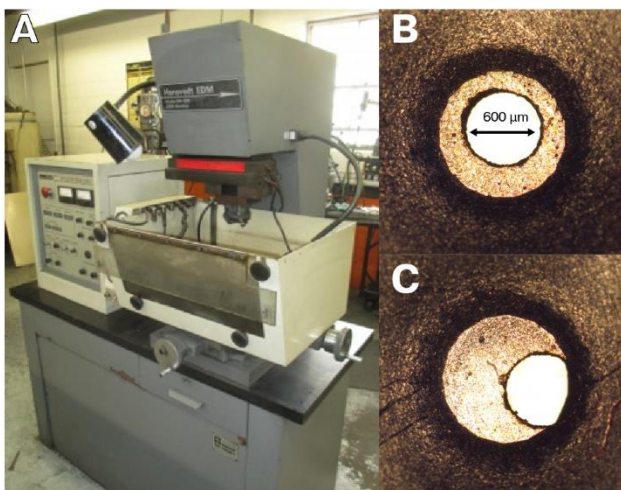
| Electric discharge machine for hole burning. (A) Electric discharge machine (EDM) in the Physics Machine Shop in Phillips Hall. (B) on-center hole burned via spark erosion using the EDM. (C) off-center hole that is not usable for the DAC but may be typical of trial-and-error alignment.
